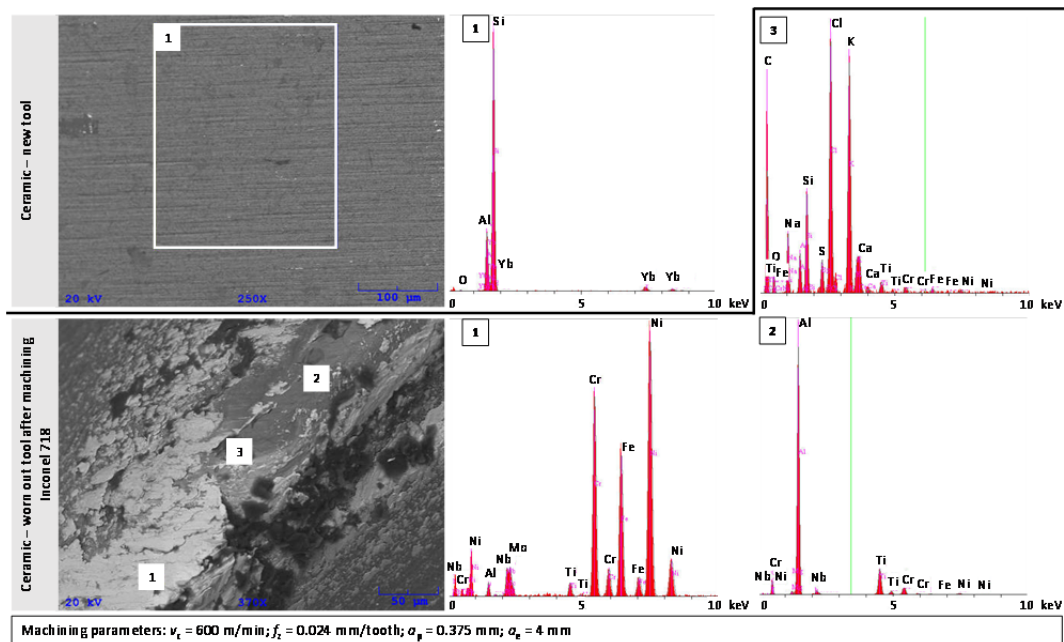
SEM-EDX analysis of ceramic tool; new tool and worn out tool after machining Inconel 718
